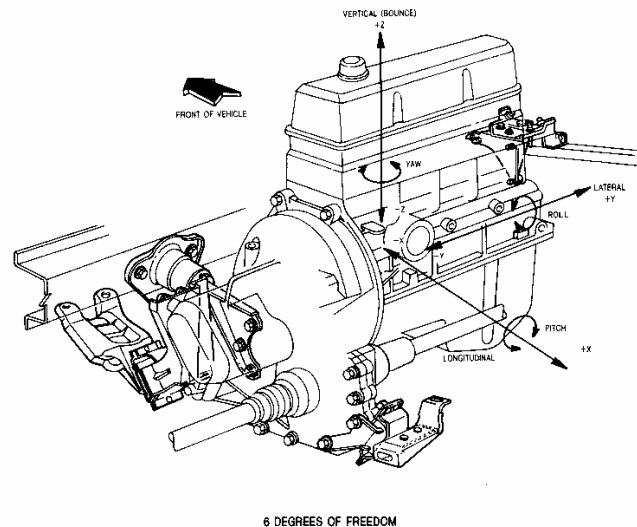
Typical transverse engine and mounting hardware. (Photo courtesy of Ford Motor Company.)
